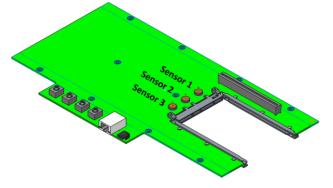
</u>: SFF Card Thermal Test Fixture PCB
